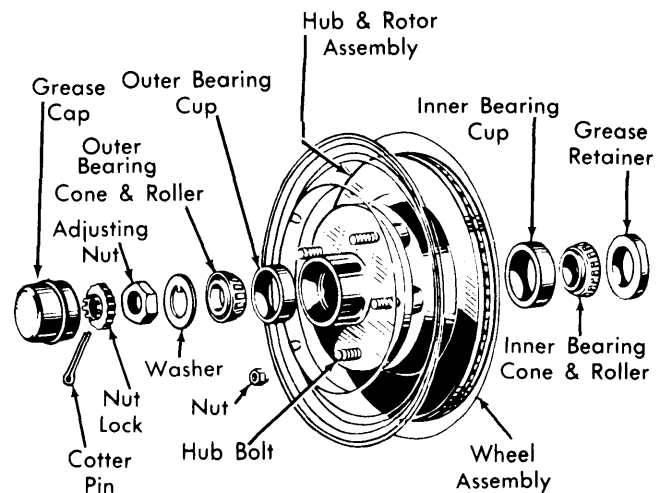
Exploded View of Wheel Bearing Components with Disc Brakes
